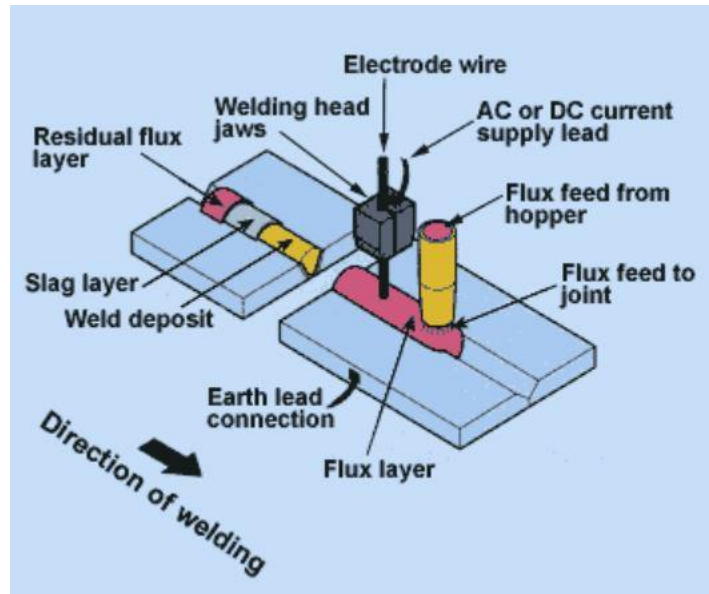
Submerged arc welding setup. Reprinted from [9]
